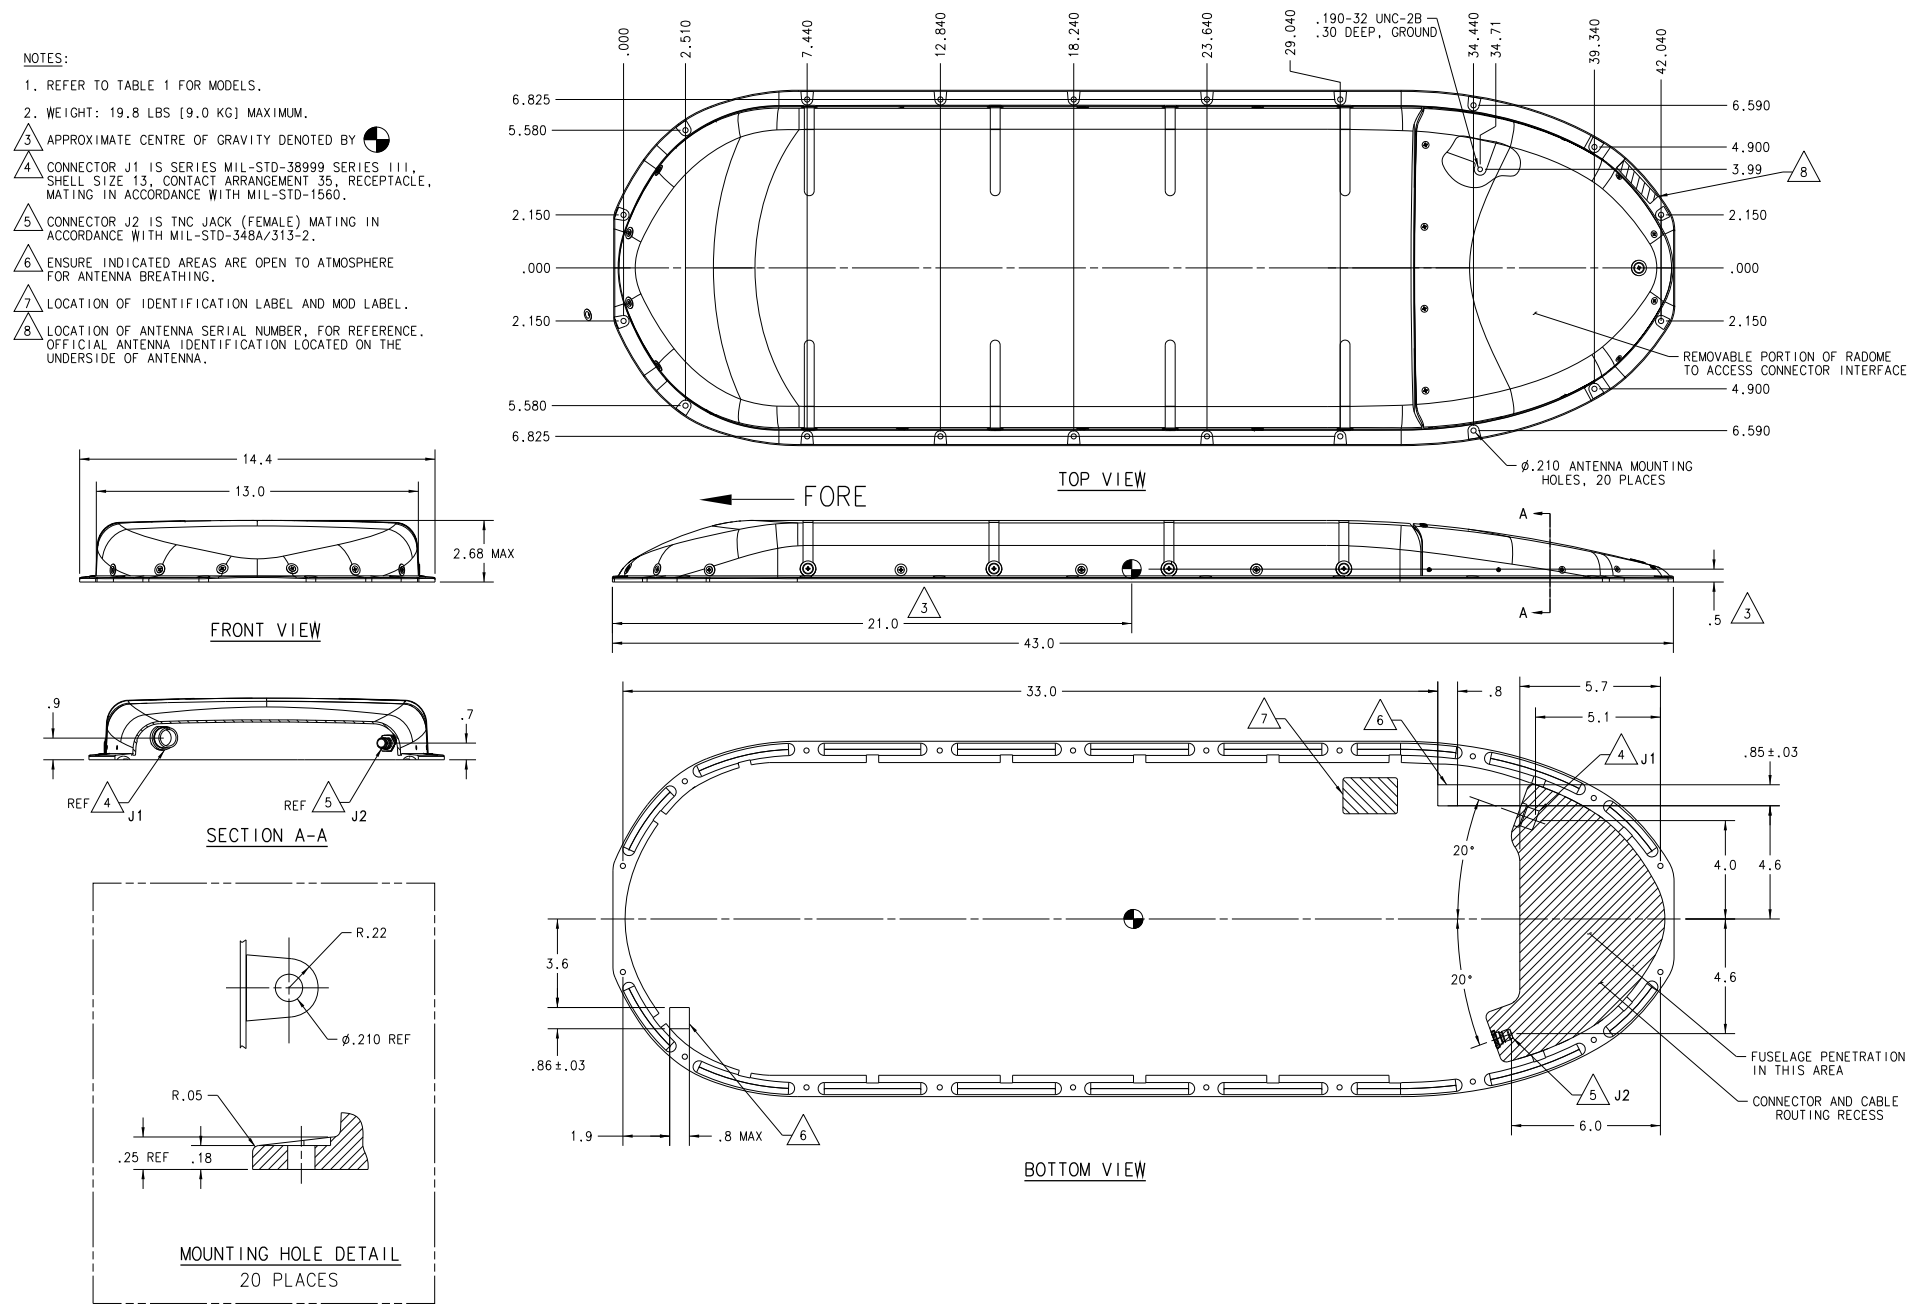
AMT-3800 HGA Outline and Installation Drawing
